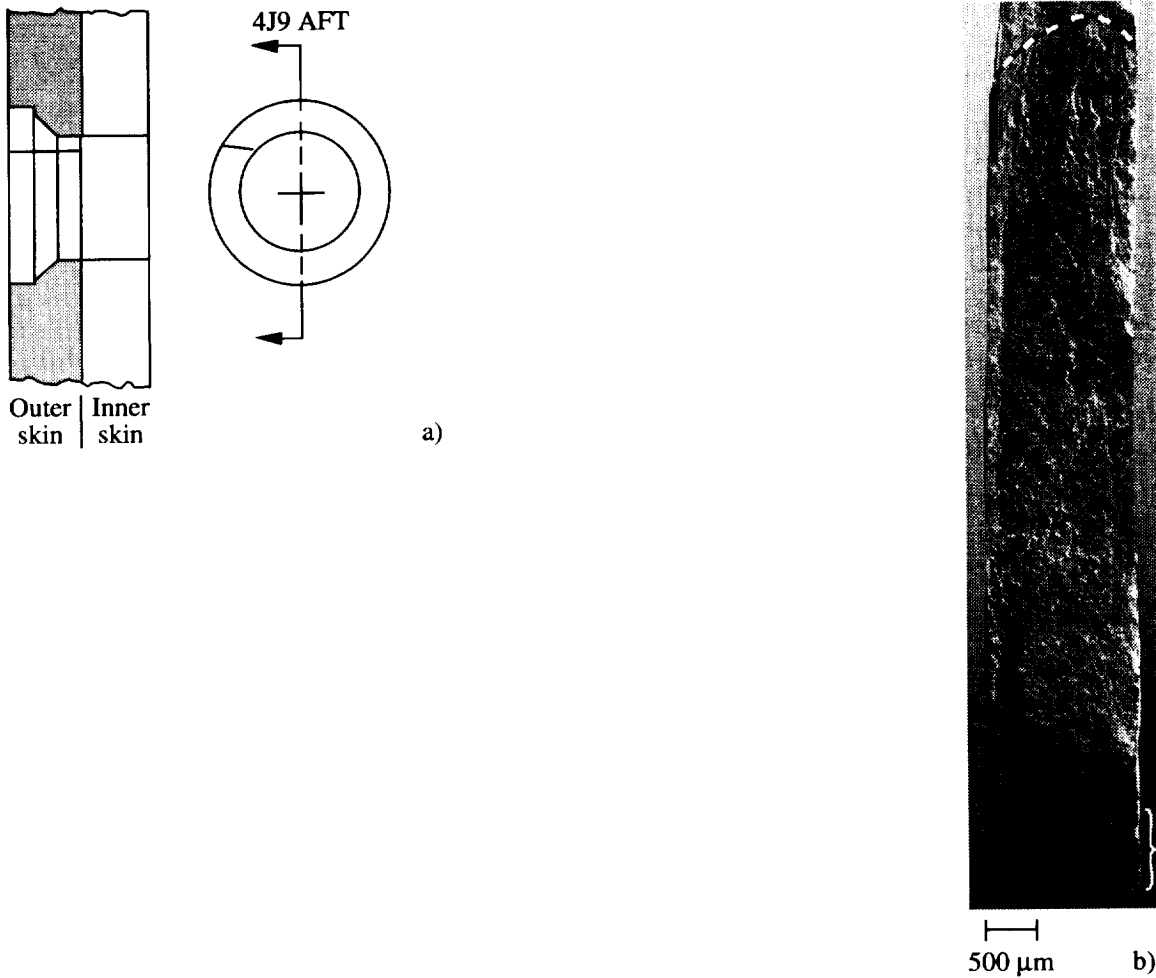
a) The schematic shows the rivet hole 4J9 configuration and the location of the outer skin fatigue crack oriented in the aft direction and about the 10 o'clock position. b) The SEM micrograph shows the fatigue crack fracture surface located at the outer skin rivet hole (bottom). The bracket marks the likely region of crack initiation and the dashed line marks the fatigue crack front.
